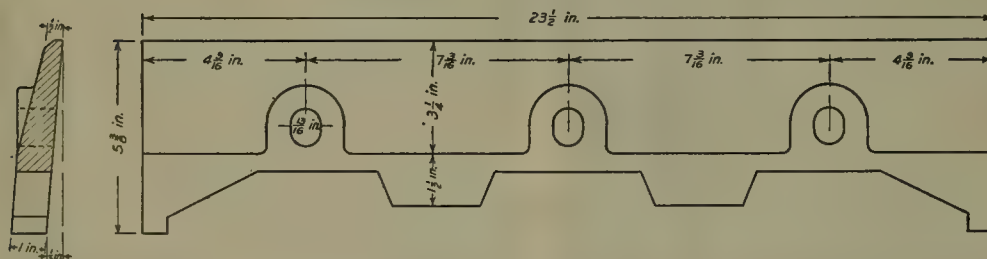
DEVICE FOR CONNECTING THE GRATE TO THE PALLET OF THE DWIGHT & LLOYD SINTERING MACHINE
